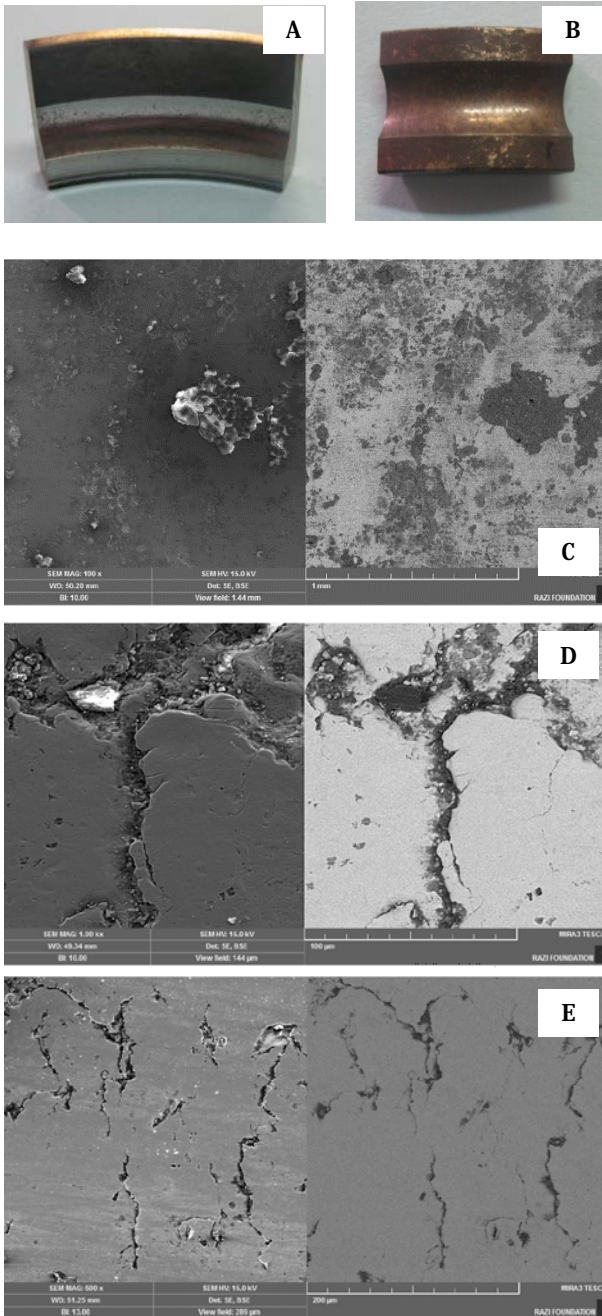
Deep seated rust microstructure in an angular contact ball bearing rings; A-Outer race, B-Inner race, (Mag: C-100×, D-1000×, E-500×)
